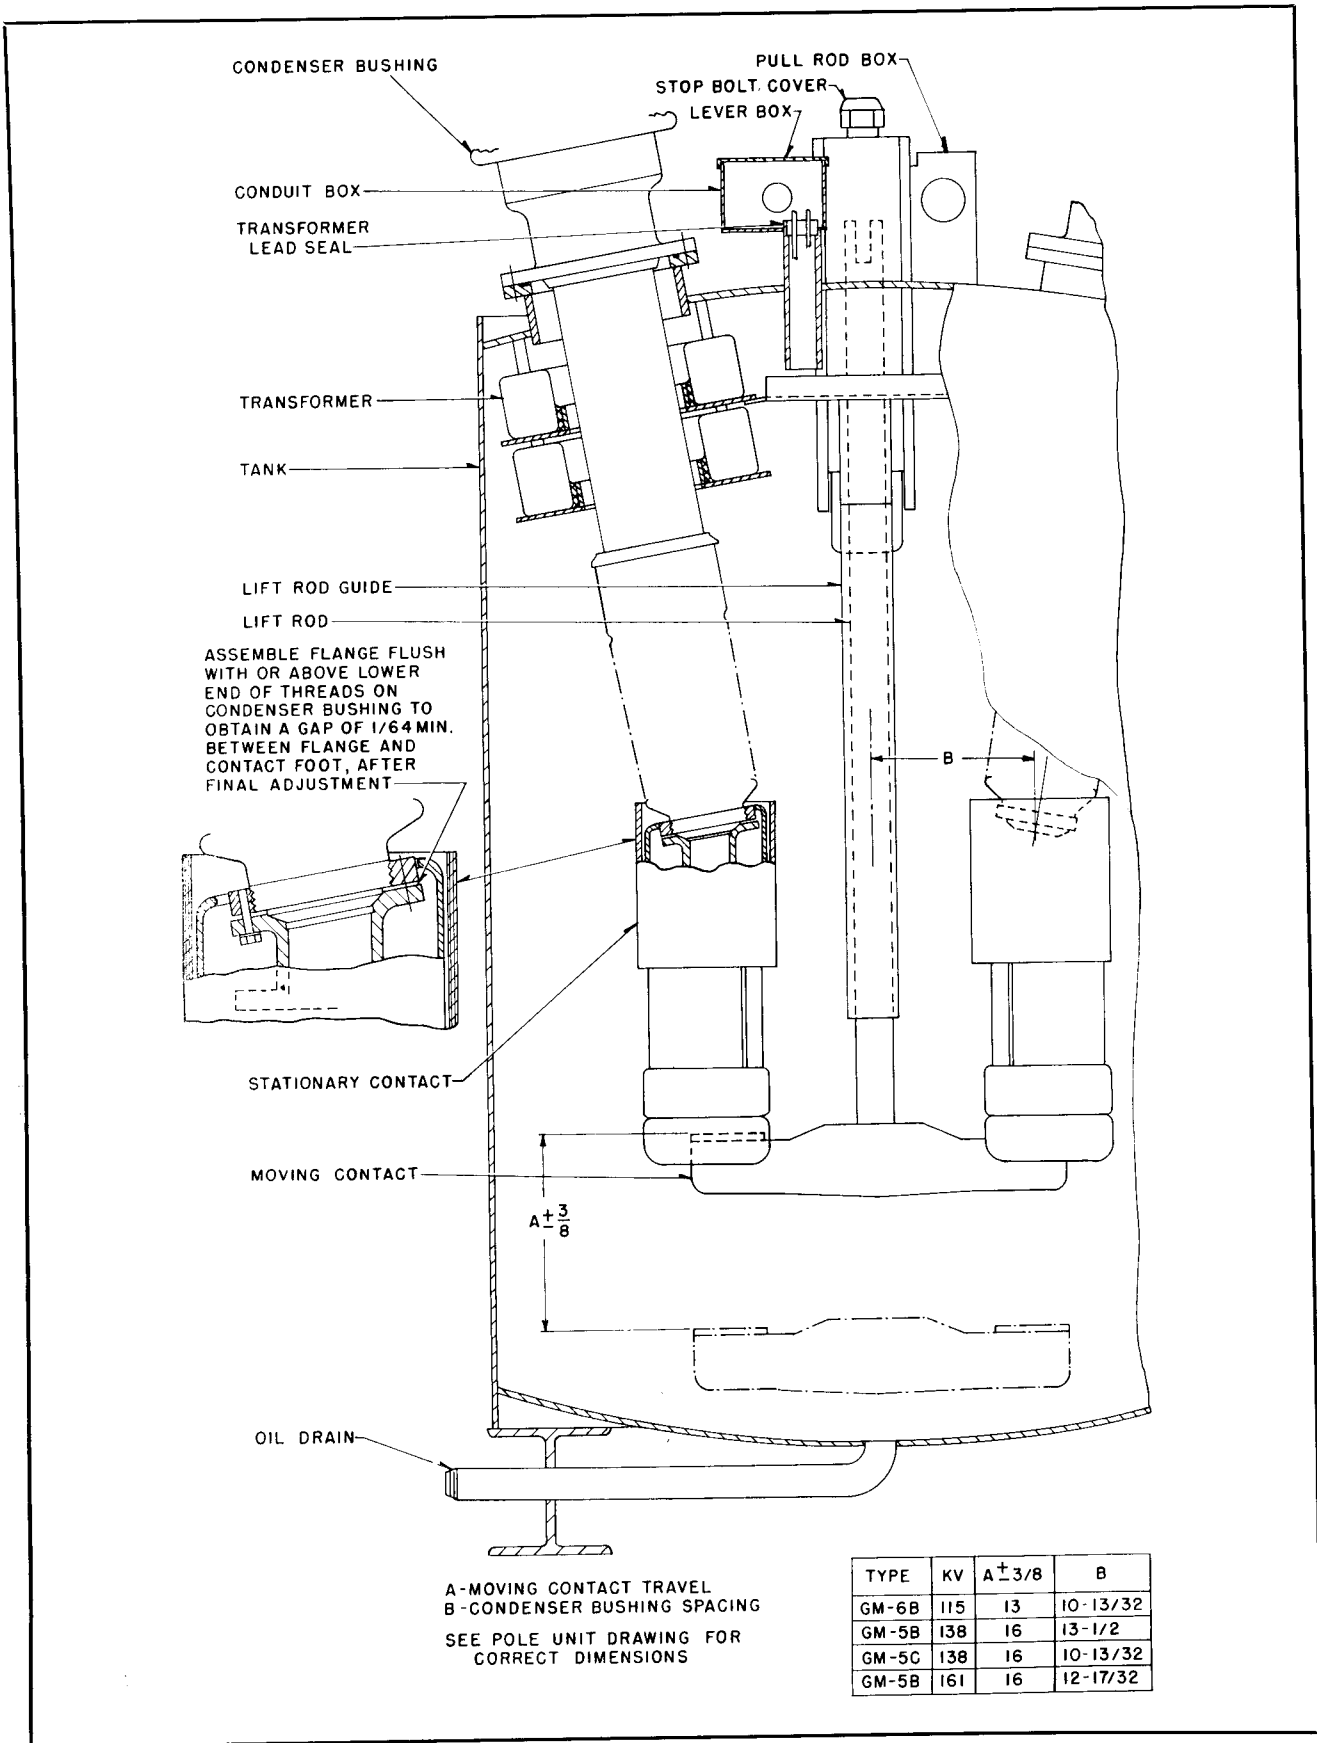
Section View of Pole Unit Assembly and Moving Contact Travel Dimensions
